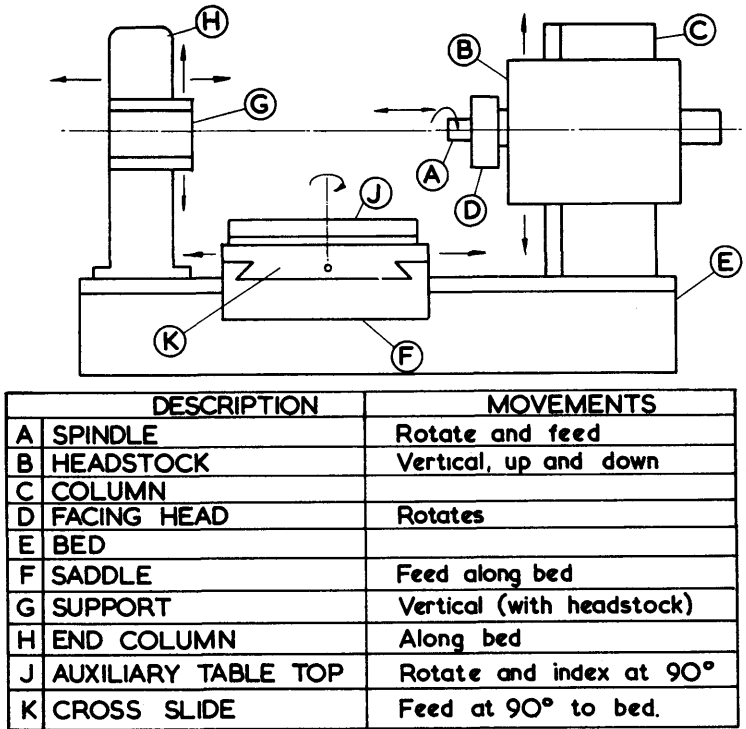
Elements of the Horizontal Boring Machine.
